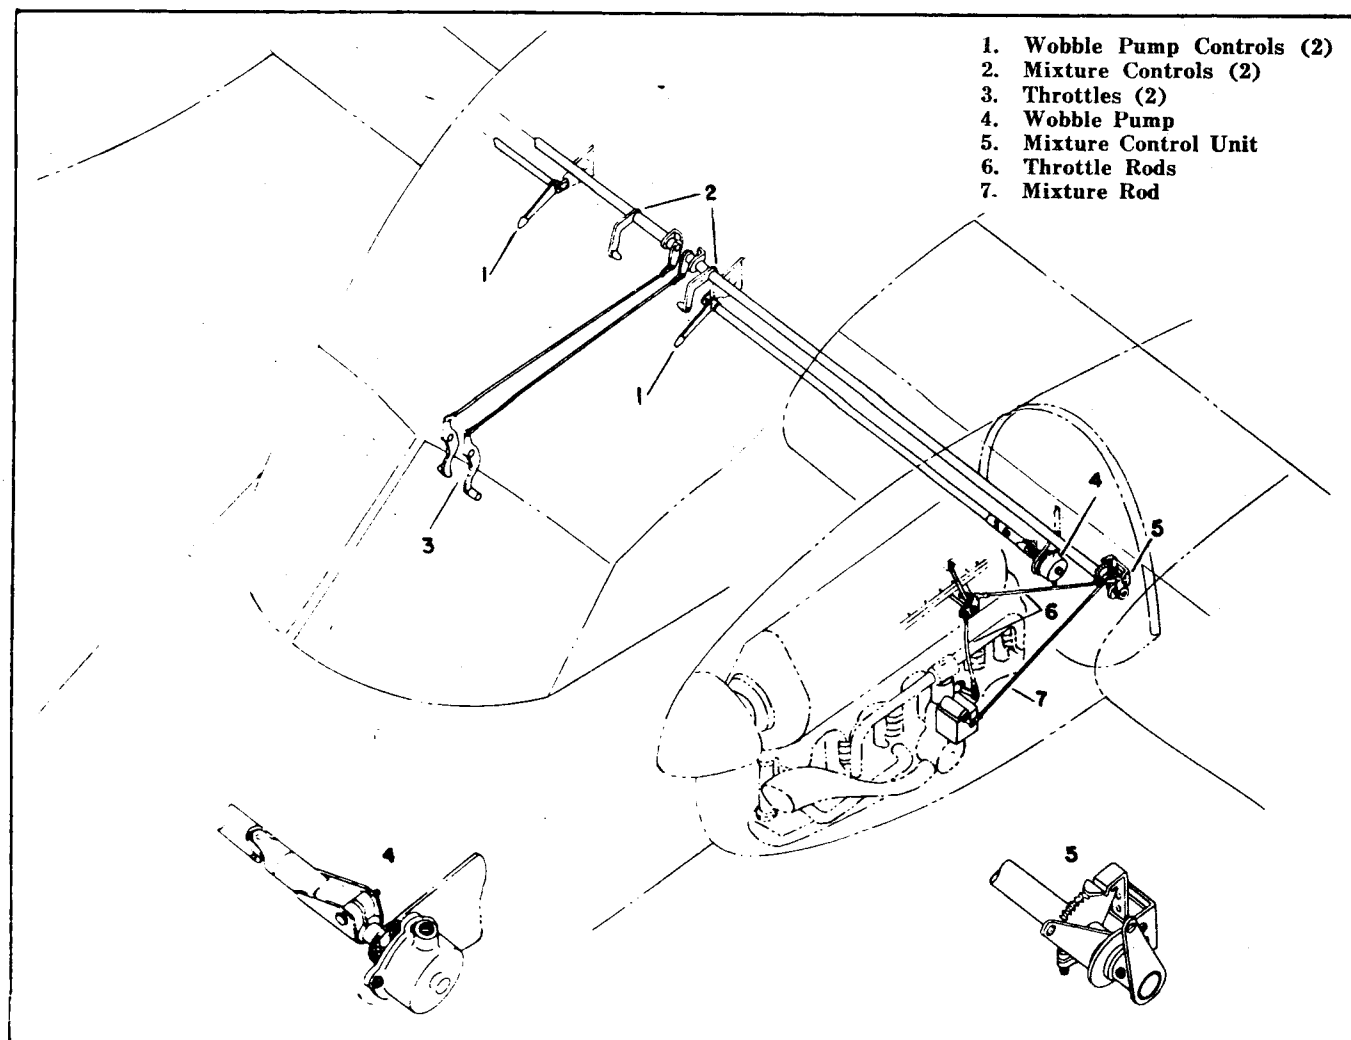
Engine Controls: Throttle, Wobble Pump and Mixture
